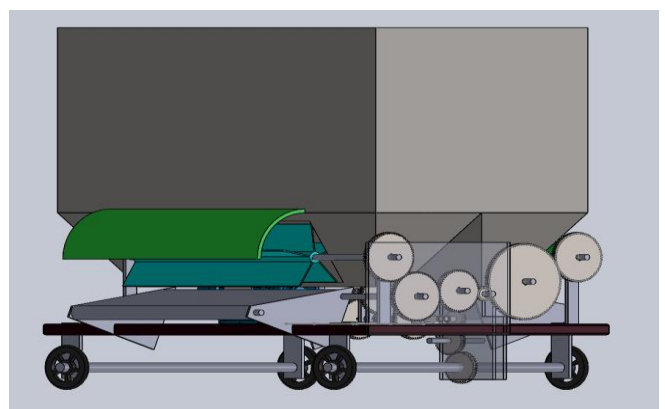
Isometric View of assembly with all views. Green part is cover for safety purpose.
